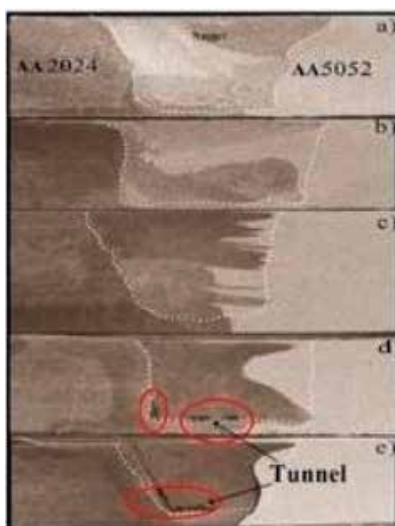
Cross sectional macrostructures of welded samples.
